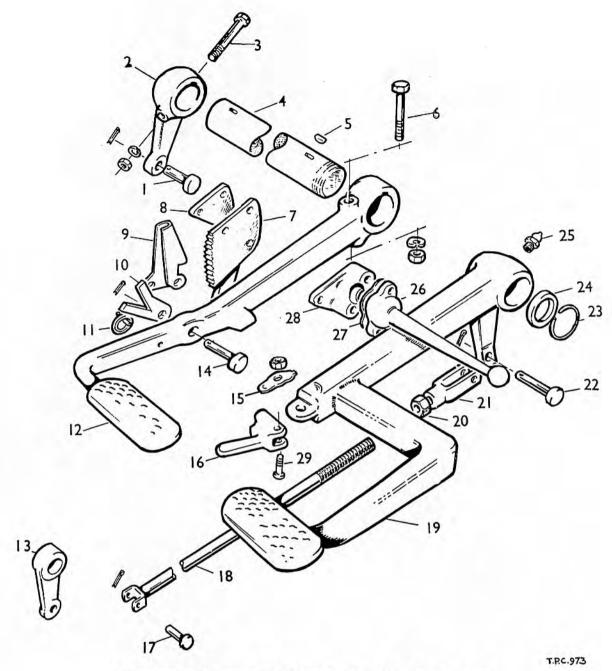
EXPLODED VIEW OF BRAKE PEDALS AND RELATED PARTS.
